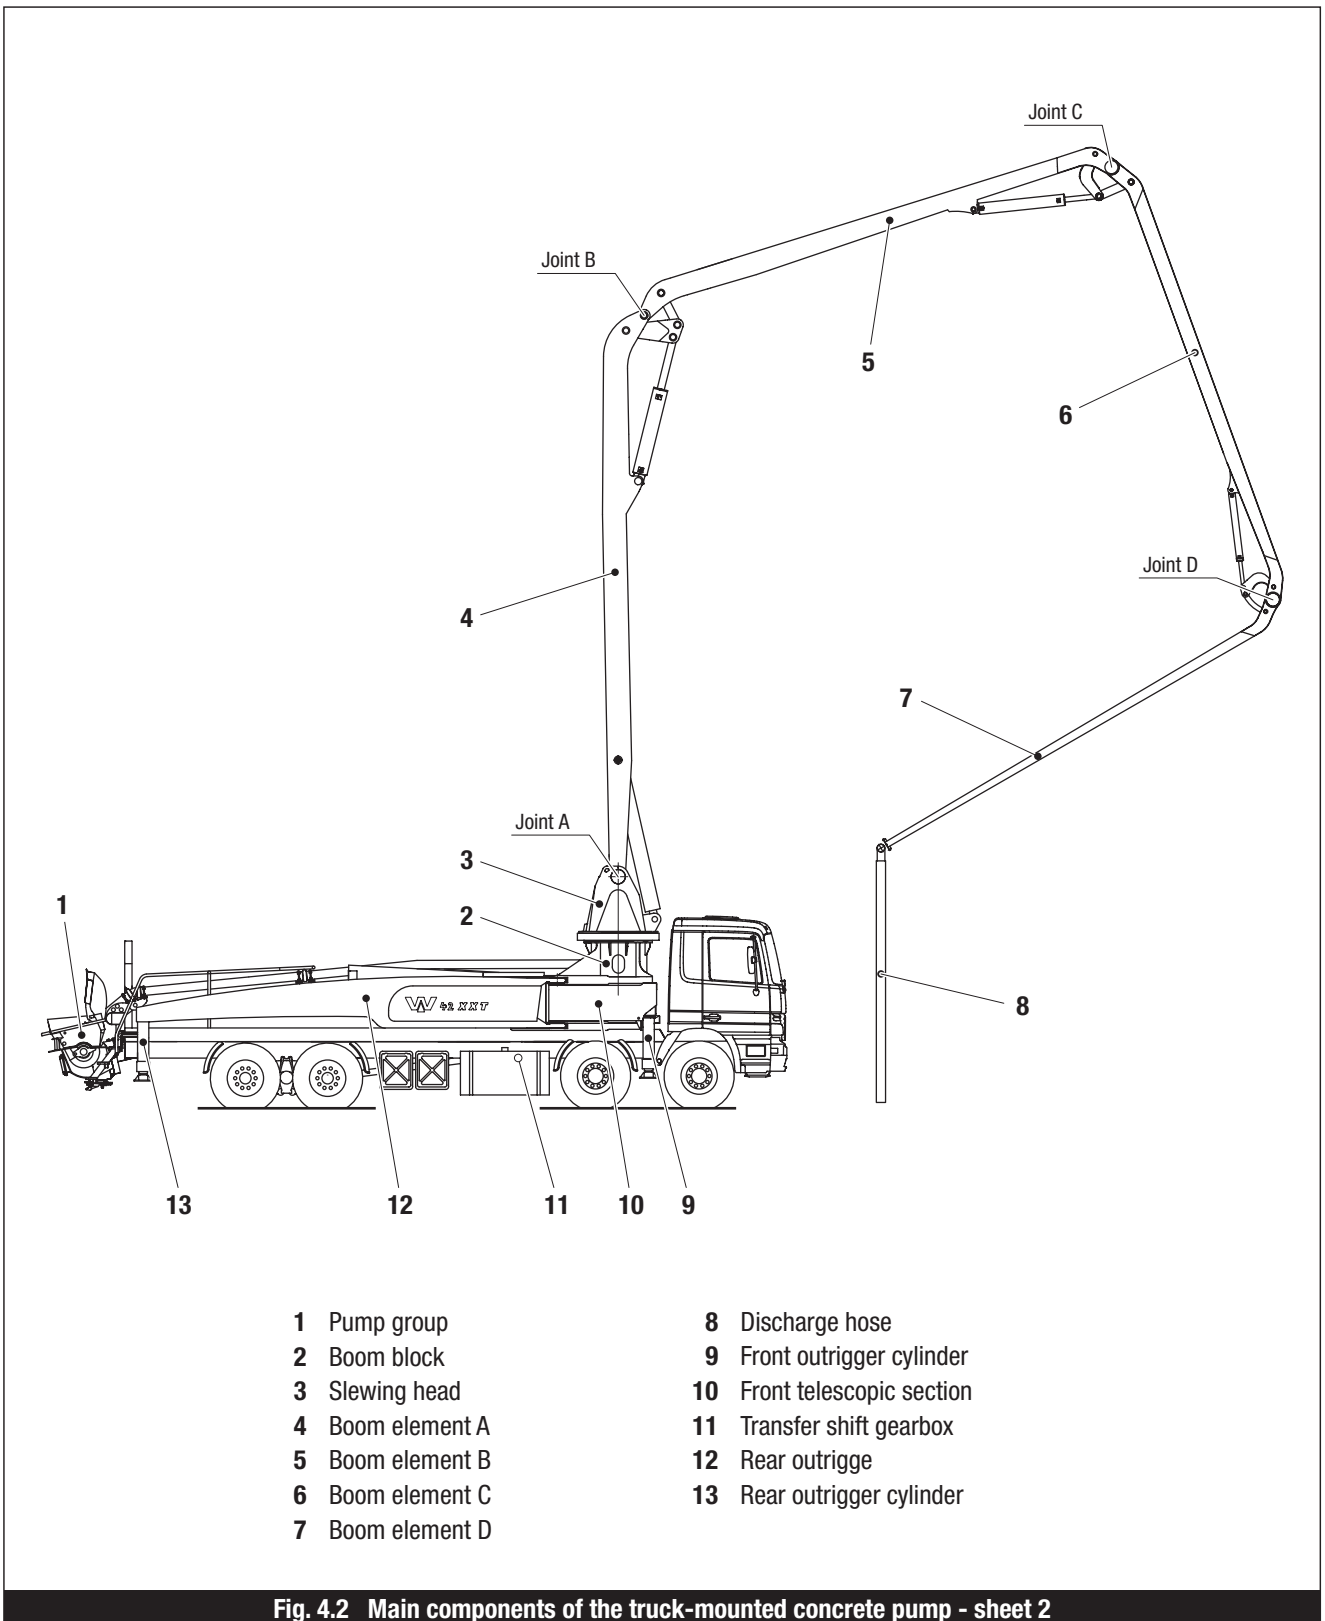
Main components of the truck-mounted concrete pump - sheet 2
